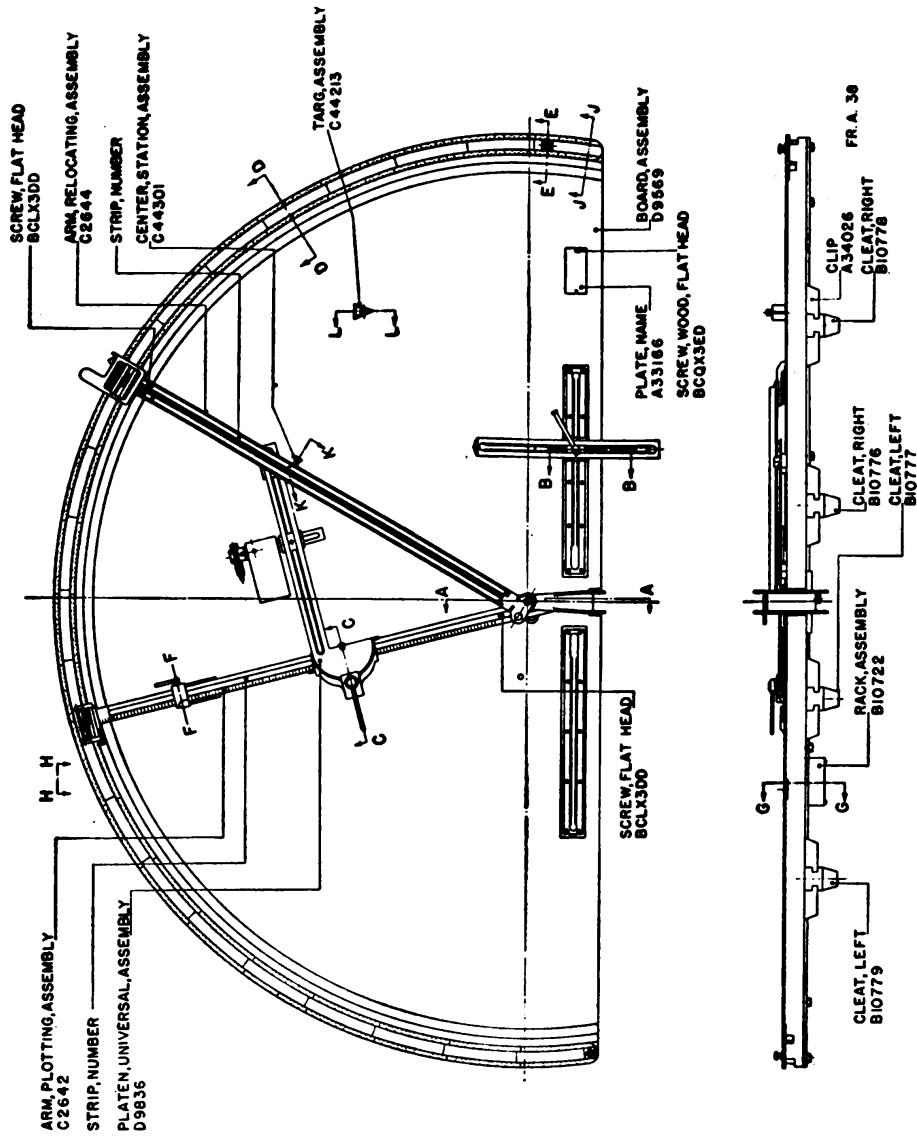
Clope plotting and relocating board M1923— assembled views.
